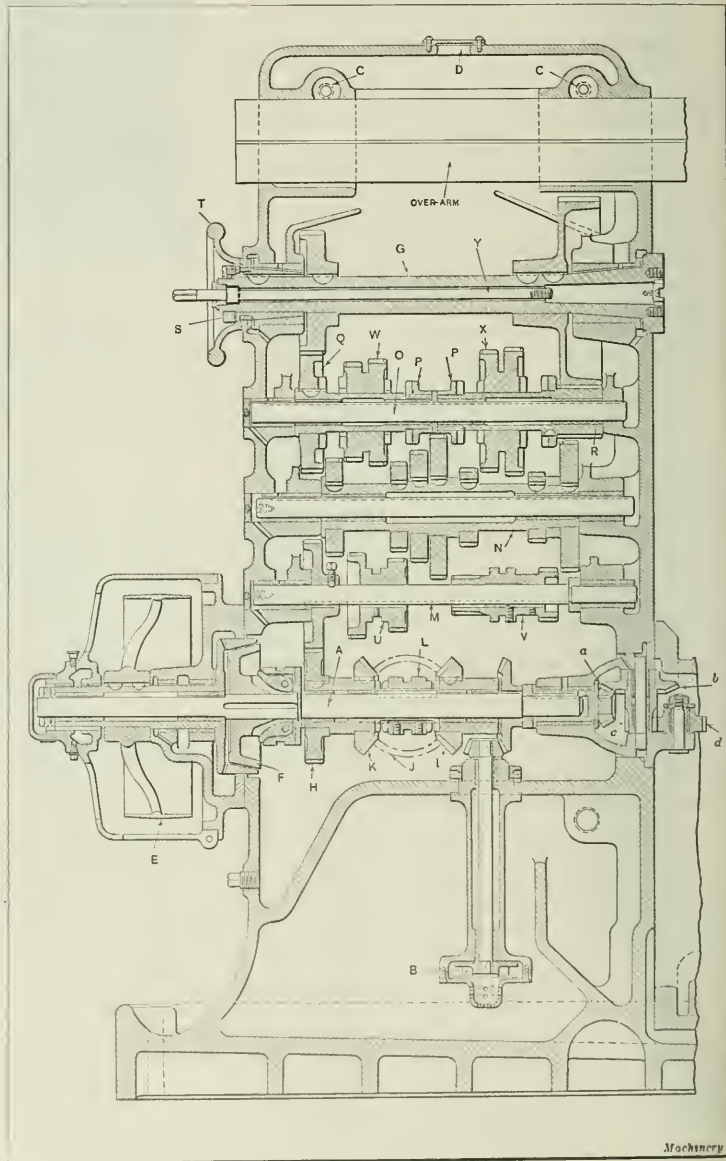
Cross-sectional View of Column of Cleveland Milling Machine, showing the Main Drive and the Drive to the Spindle and Centrifugal Pump
